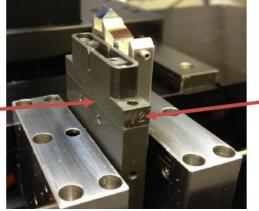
Remove filament body screws using a 5/64" hex key or balldriver.
